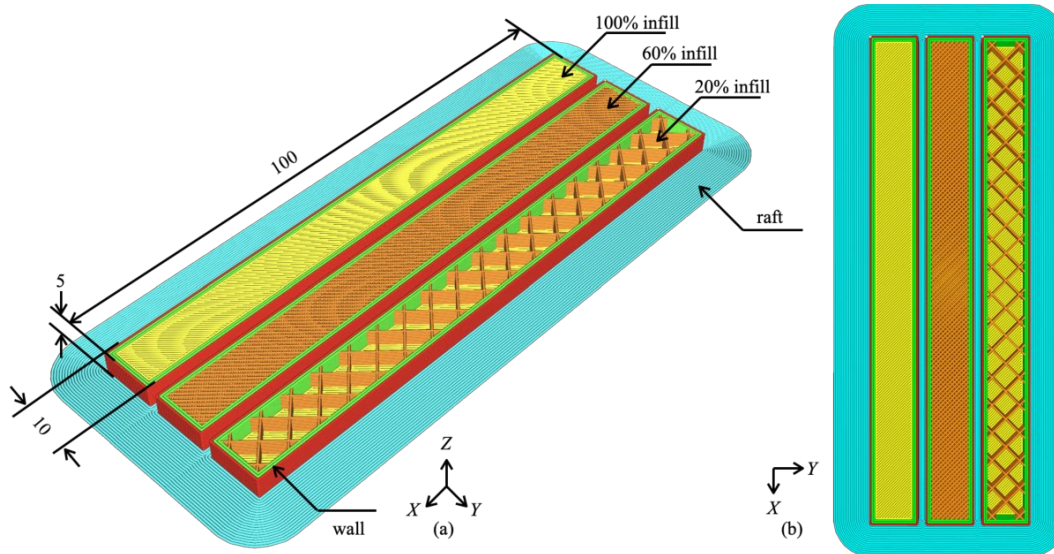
Specimens in (a) isometric view and (b) top view (all dimensions in mm).
